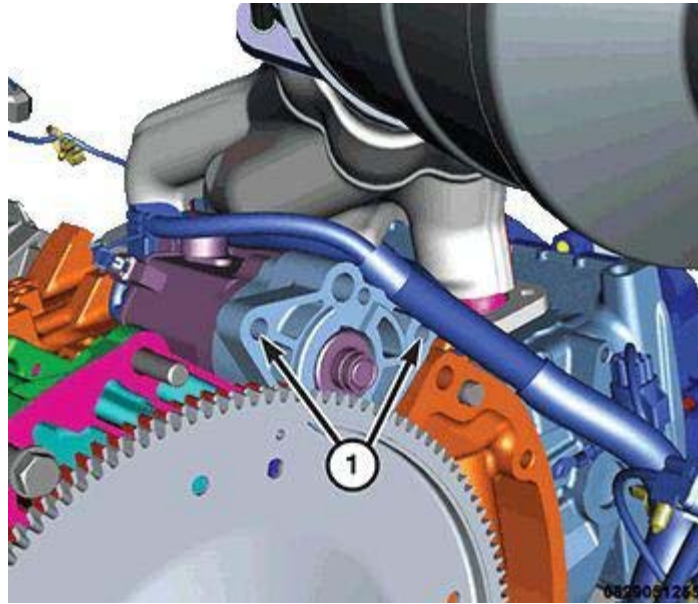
Starter Mount To Transmission Bell Housing Bolts
